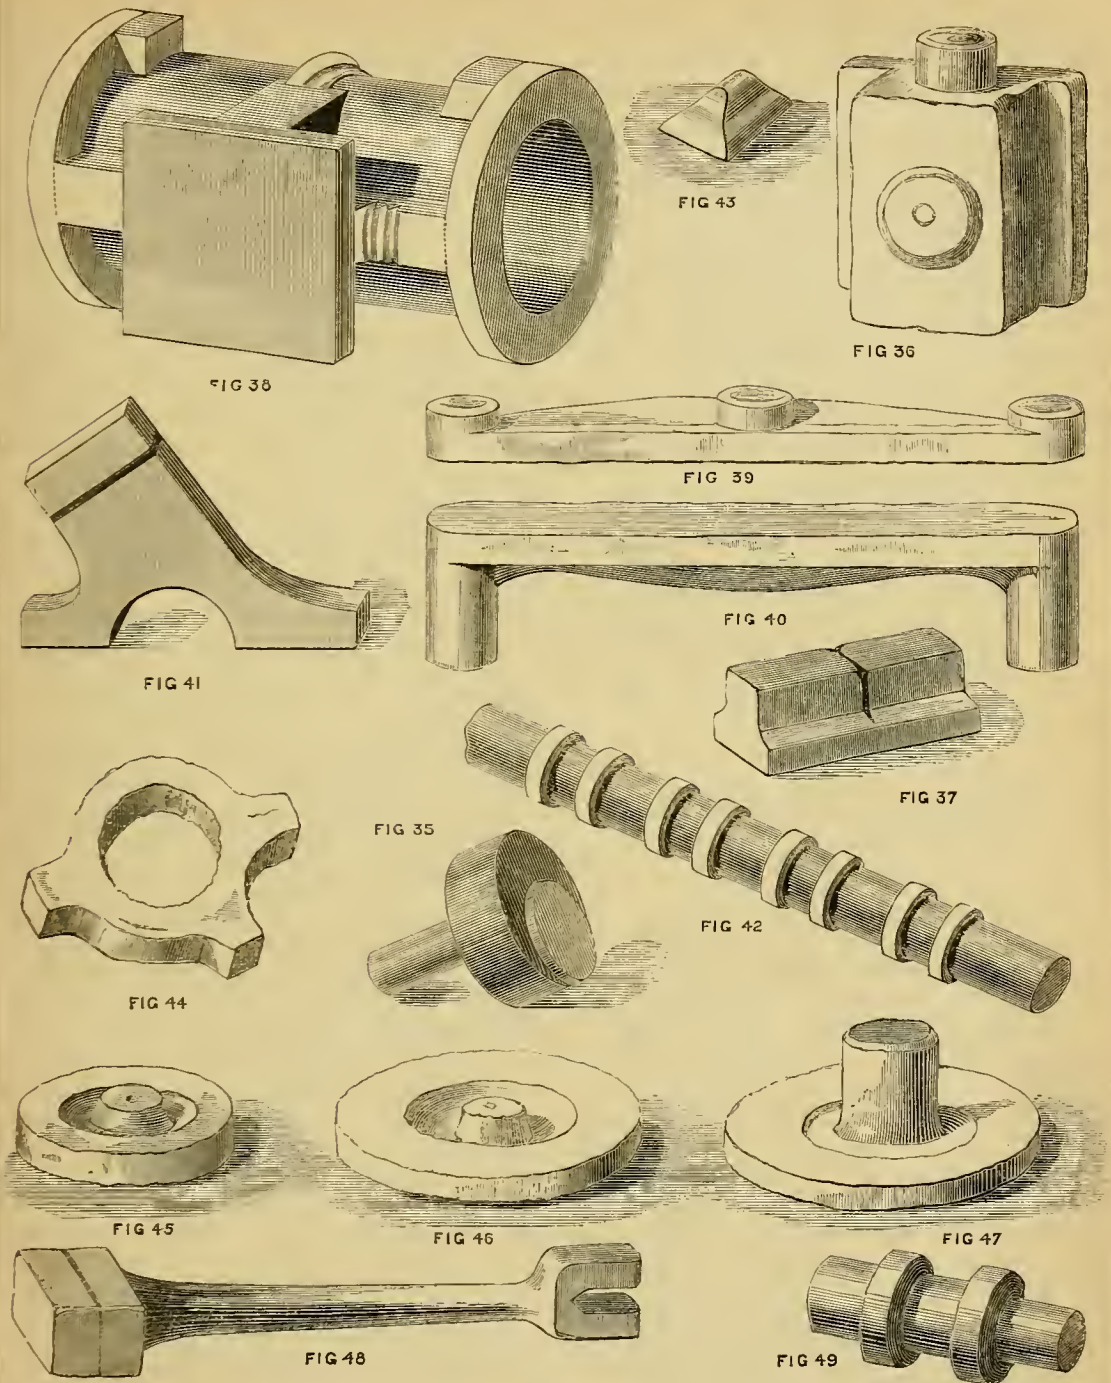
ECCENTRIC. FIG. 36.—STEAM CHEST. FIG. 37.—GUIDE BLOCKS. FIG. 38.—CYLINDER. FIG. 39.—PARALLEL BARS—TOP. FIG. 40.—PARALLEL BARS—BOTTOM. FIG. 41.—BEARING FOR SHAFT. FIG. 42.—DISTANCE PIECES FOR PARALLEL GUIDE BARS. FIG. 43.—SLIDE VALVES. FIG. 44.—ECCENTRIC BAND. FIG. 45.—PISTON. FIG. 46.—TOP OF CYLINDER. FIG. 47.—TOP OF CYLINDER. FIG. 48.—CONNECTING ROD. FIG. 49.—CYLINDER COVER AND STEAM CHEST GLANDS.
